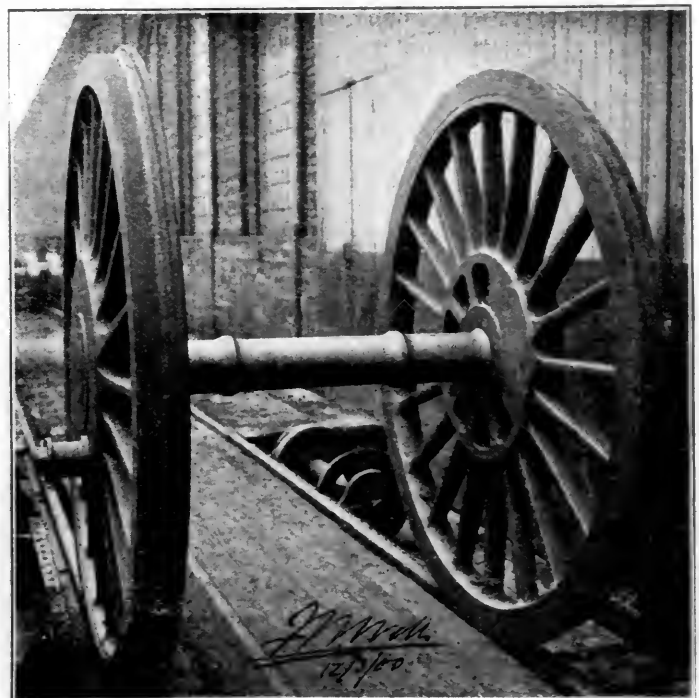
Photograph of Rear Driving Wheels and Axle.
